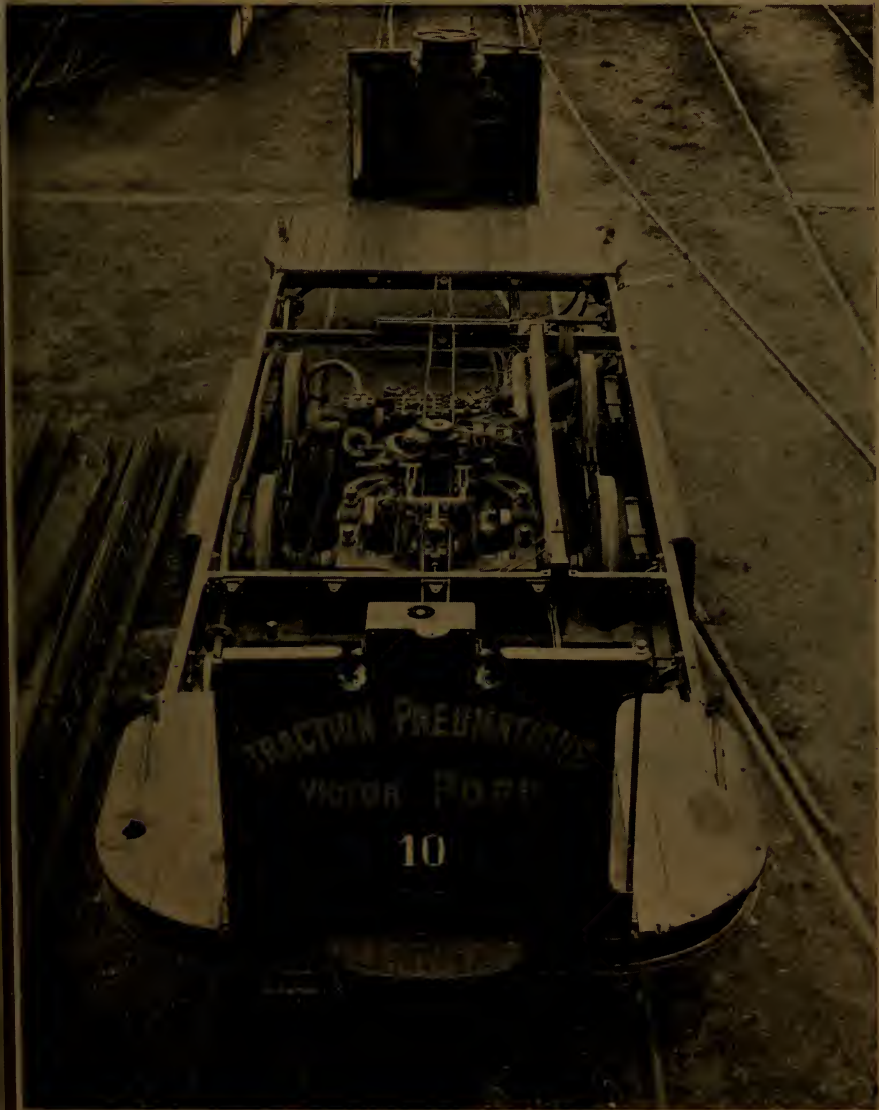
MECHANICAL TRUCK AND FRAME READY TO RECEIVE THE CAR BODY.
